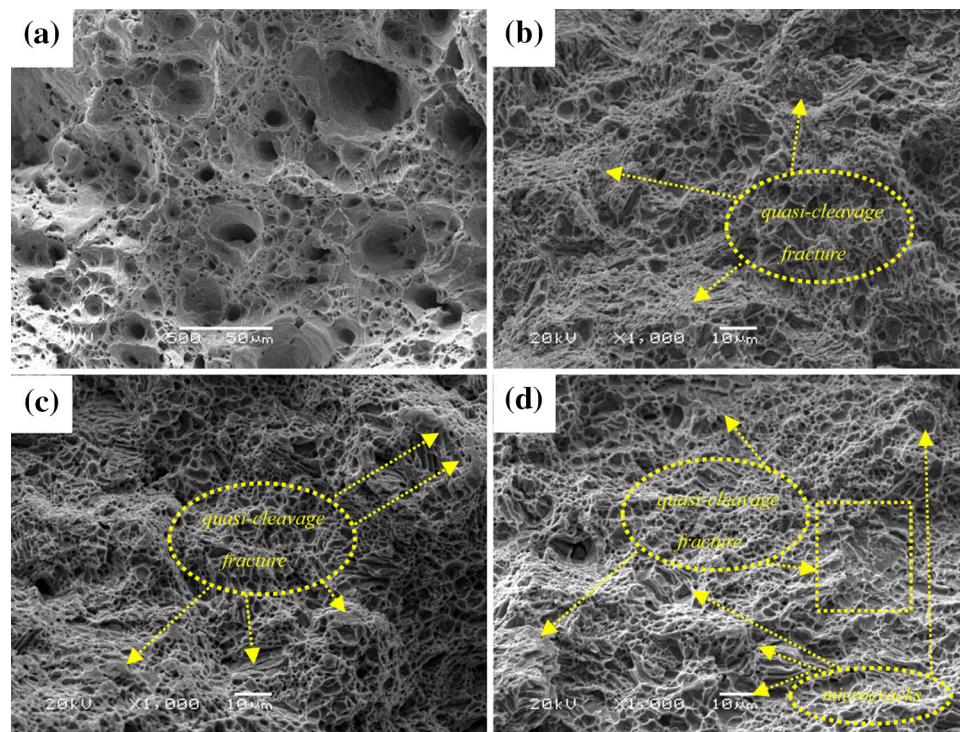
Fracture surface morphology of the mini-tensile samples: (a) granular pearlite; (b) 1 pass; (c) 2 passes; and (d) 4 passes
